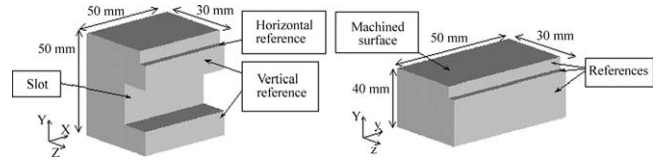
Test workpieces. (a) End milling test workpiece; (b) side milling test workpiece.
